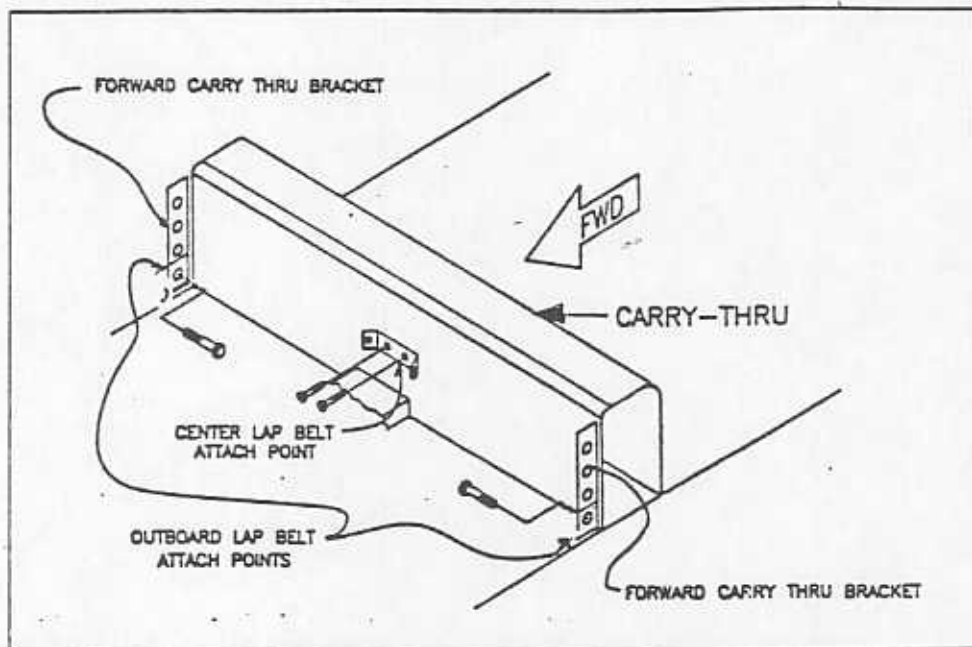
FRONT LAP BELT ANCHOR LOCATIONS
